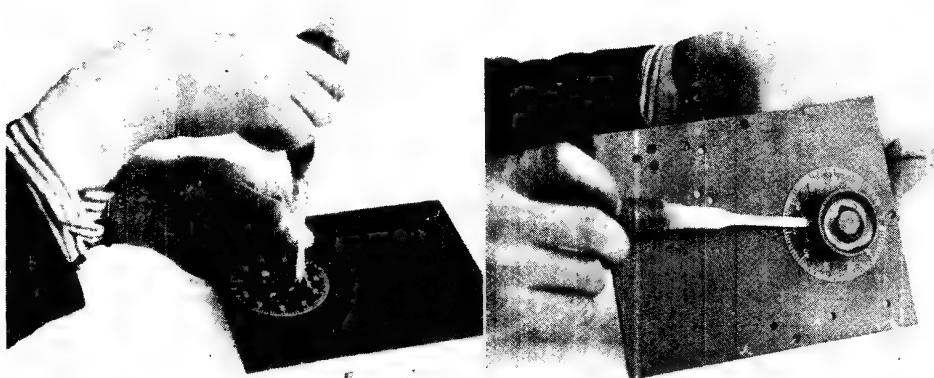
(left). Illustrated in this photograph is the method of fixing the condenser dial to the panel by small countersunk screws and bolts. Fig. 5 (right). Unless care is taken the condenser pointer may be found out of adjustment with the condenser setting. This illustration shows the method of locking the pointer in position
